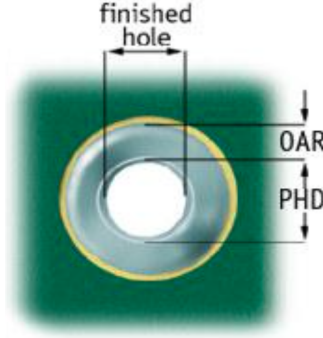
Minimum annular ring and smallest final hole [28].
